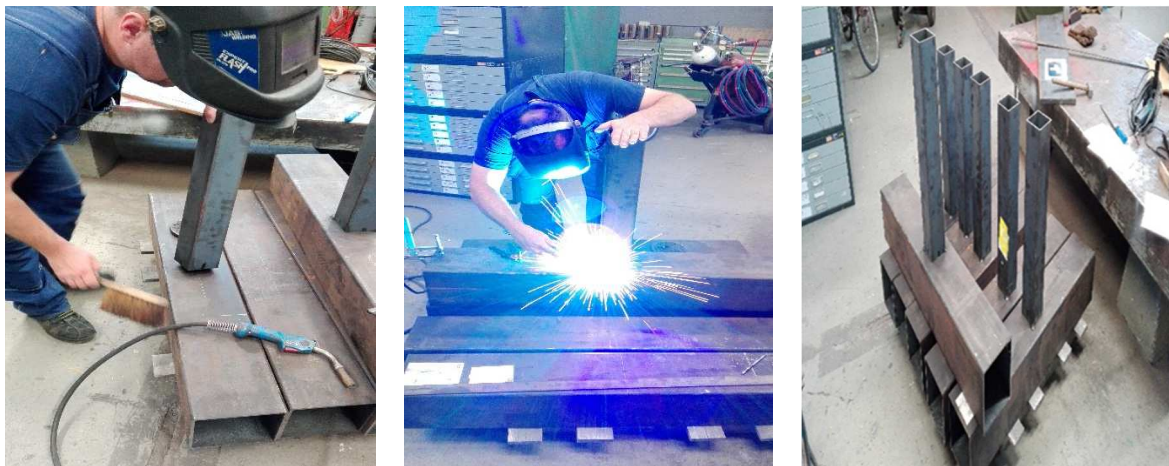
preparation of the members (left), tack welding (middle) and tack welded joint (right).
